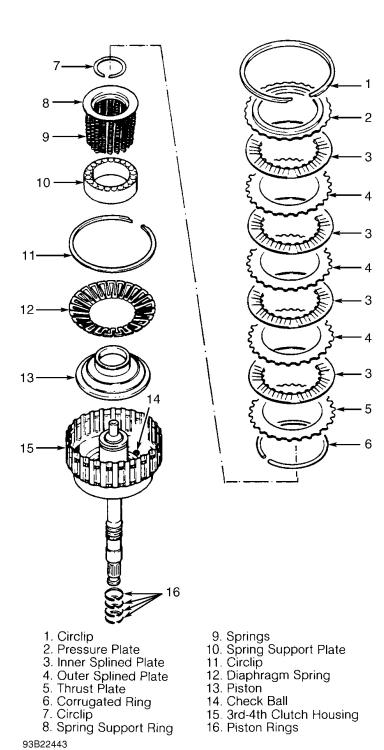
Exploded View Of 3rd-4th Apply Clutch (Early 1993) Courtesy of VOLKSWAGEN UNITED STATES, INC.
